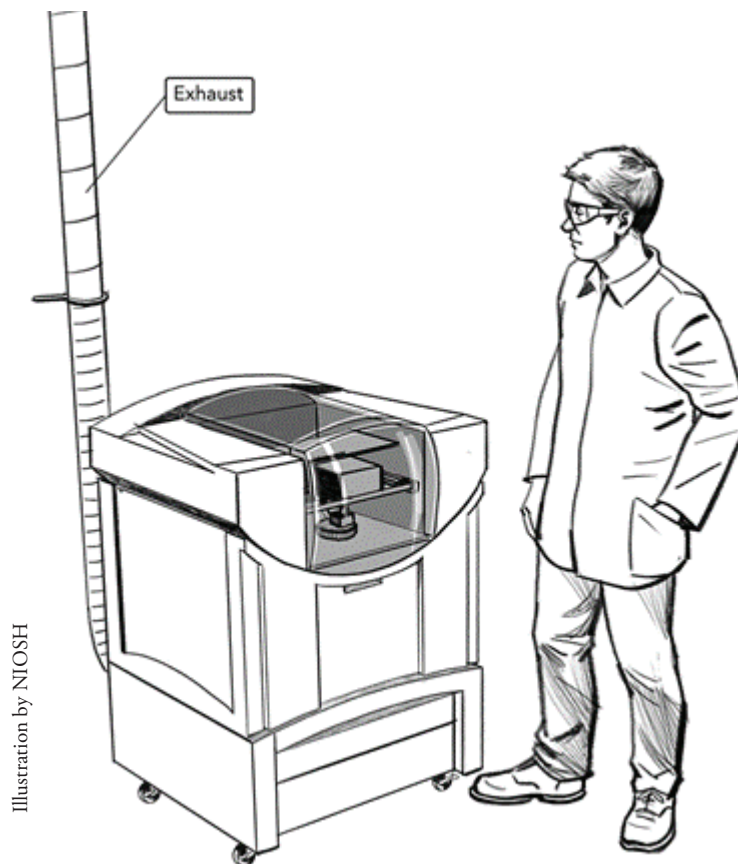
Exhausting to the outdoors using a manufacturer-installed connection.
